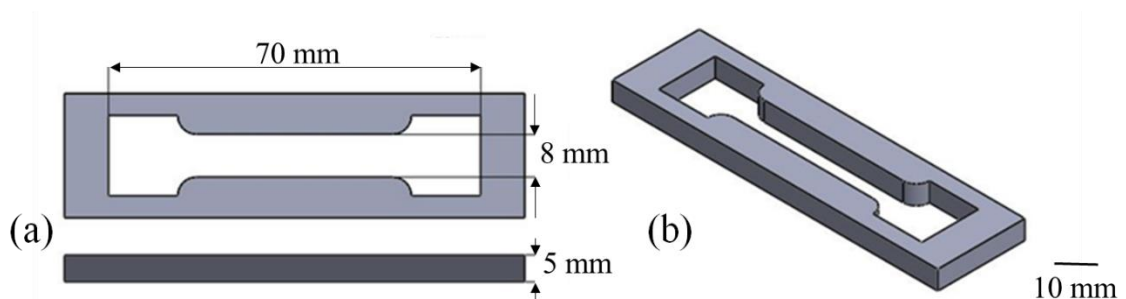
SolidWorks design of the tensile specimen mold. (a) Top view (b) Isometric view
